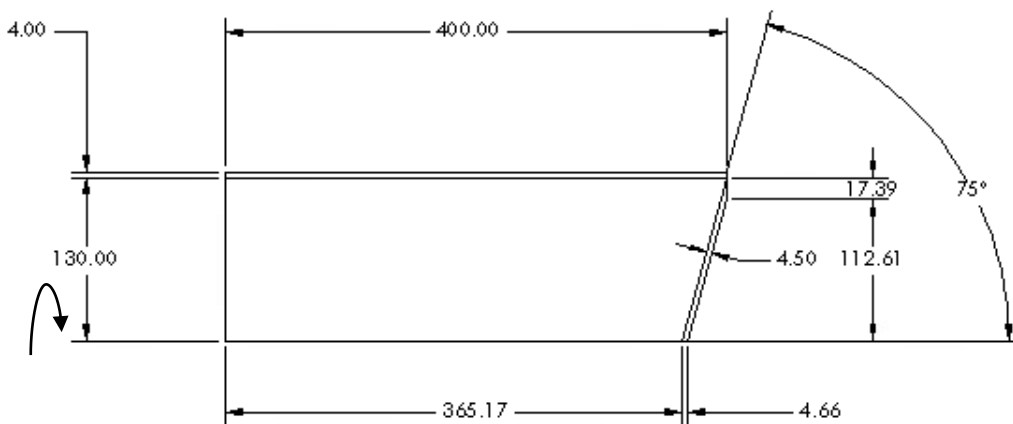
2D Drawing of 33.61 kg TNT Shaped Charge (Dimensions are in mm).
